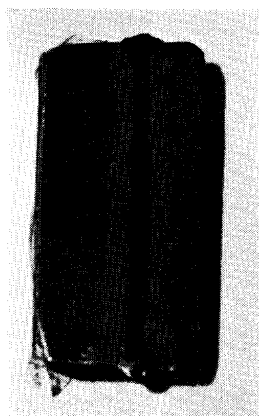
View of wide width of E.B. welded specimen 90 kv, 11 mA, 1000 mm/min, $a_b^* = 0.86$, 14% Porosity
